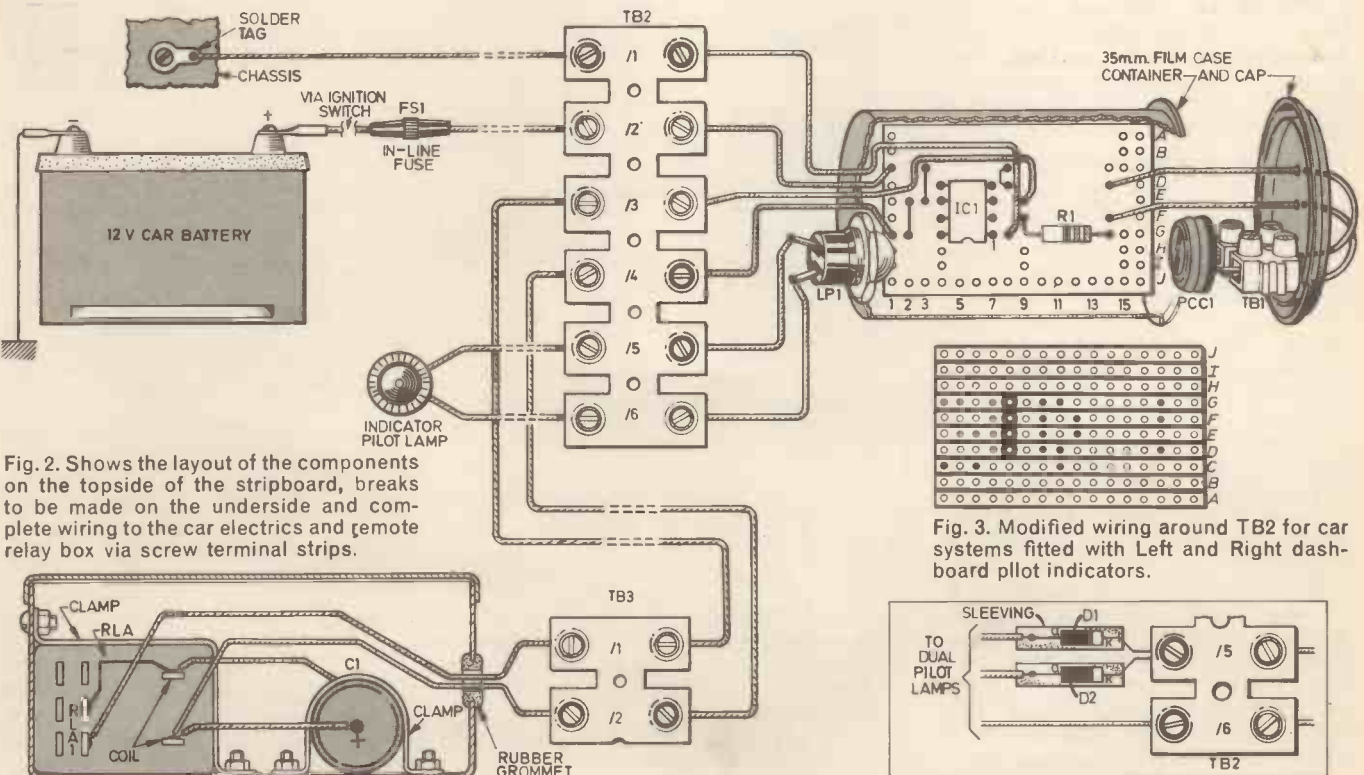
Shows the layout of the components on the topside of the stripboard, breaks to be made on the underside and complete wiring to the car electrics and remote relay box via screw terminal strips.
